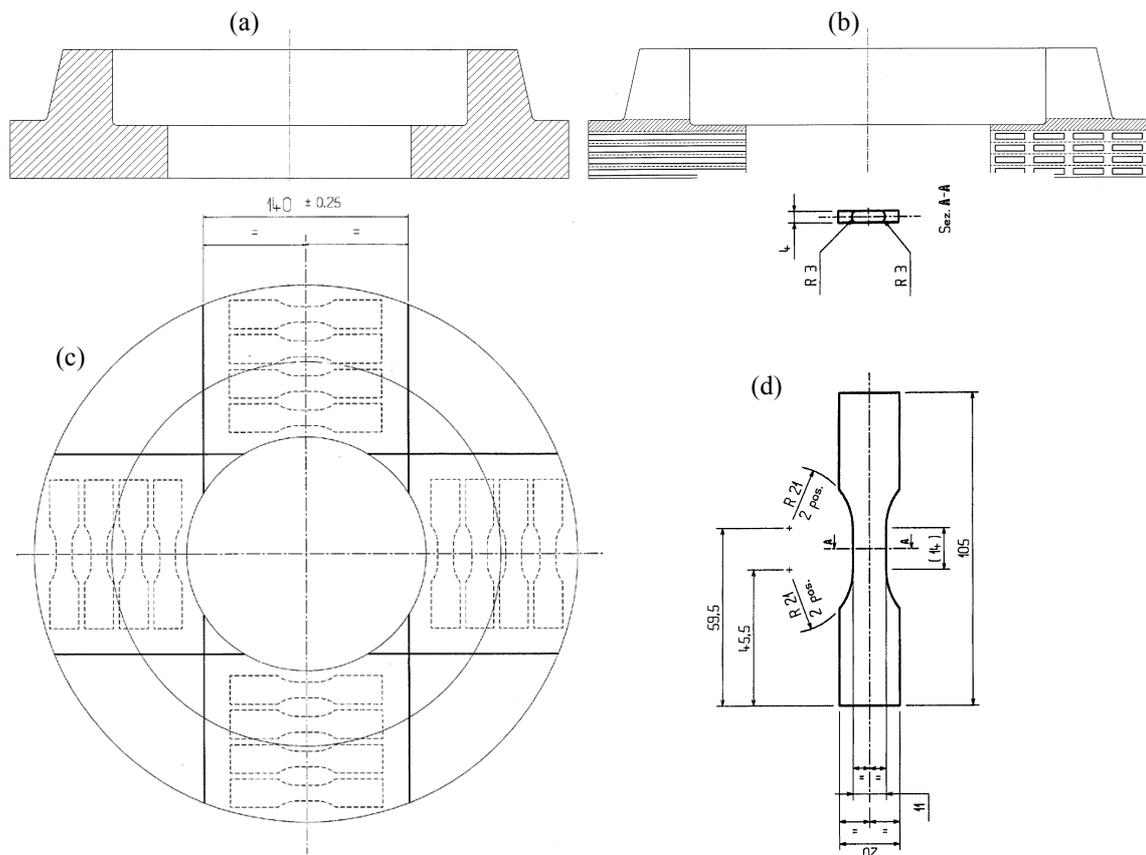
Specimen machining from IN718 disc forging for the MANHIRP program.
